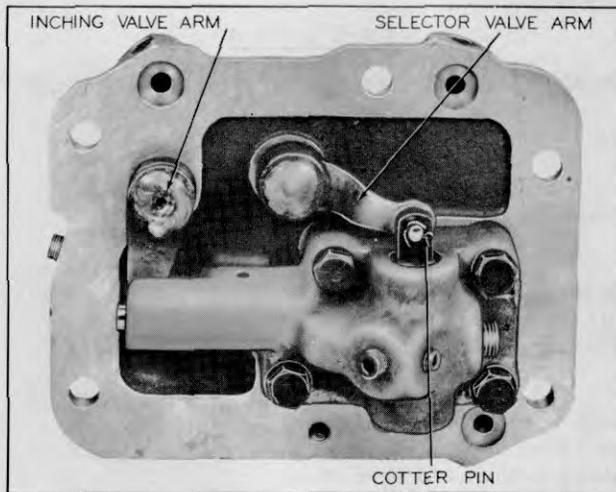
Bottom View of Control Valve and Cover (Illustration)
